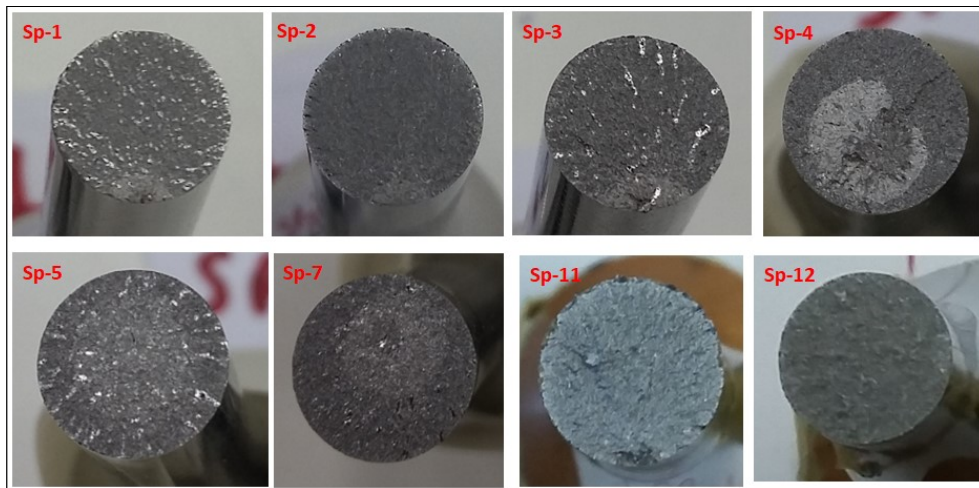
Optical image for fracture surface of group -3 failed specimens
